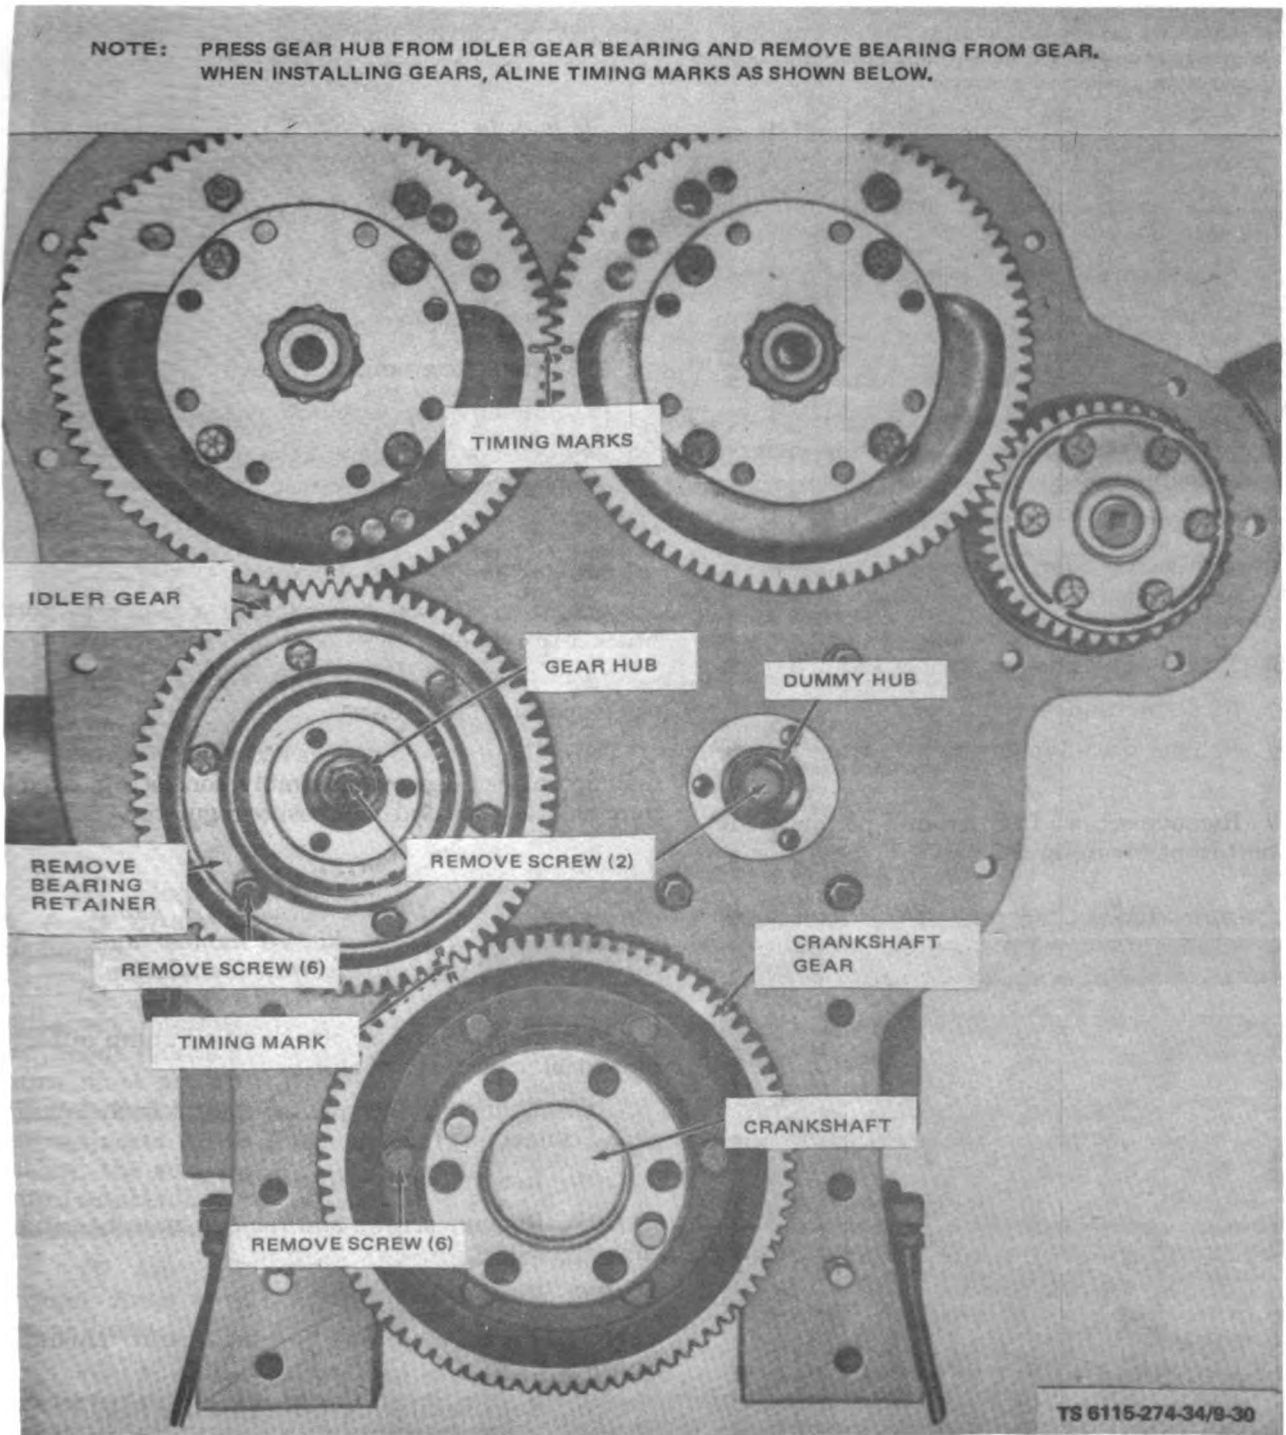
Crankshaft Gear, Idler Gear, and Dummy Hub, Removal and Installation
